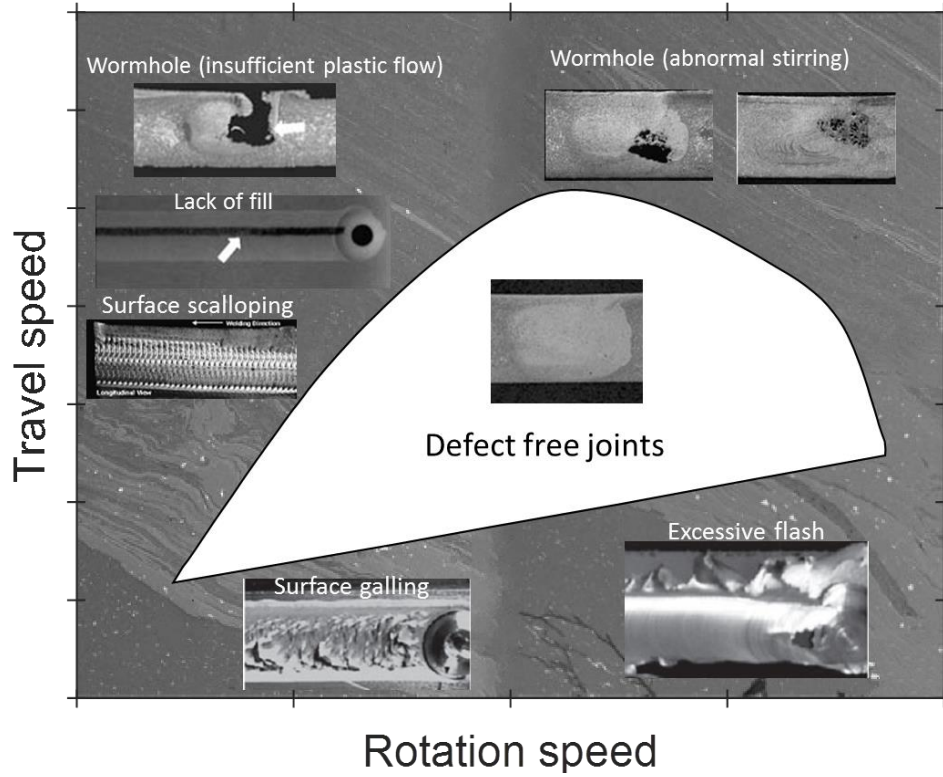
Illustration of typical FSW process window [38] and corresponding weld defects.
